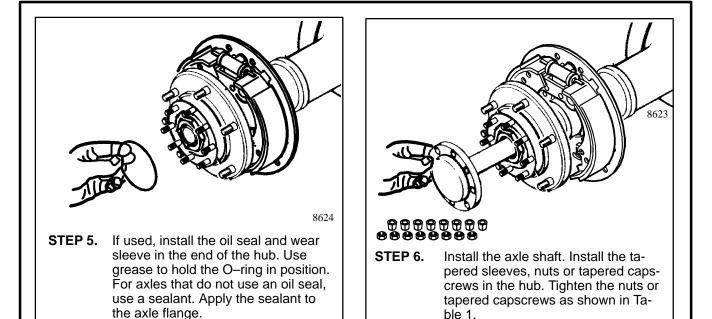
ASSEMBLY OF THE DRIVE AXLE (1 of 2) (TYPE 1 SHOWN)
